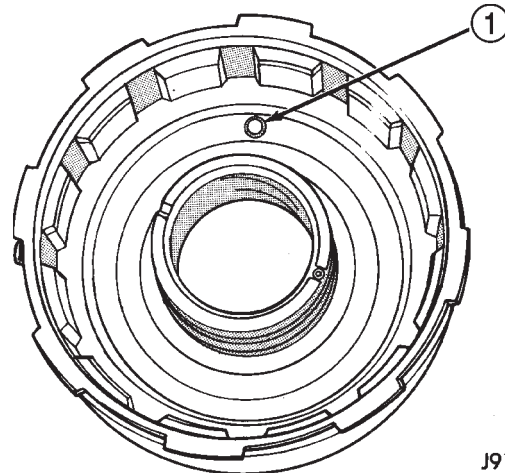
Front Clutch Piston Retainer Check Ball Location
